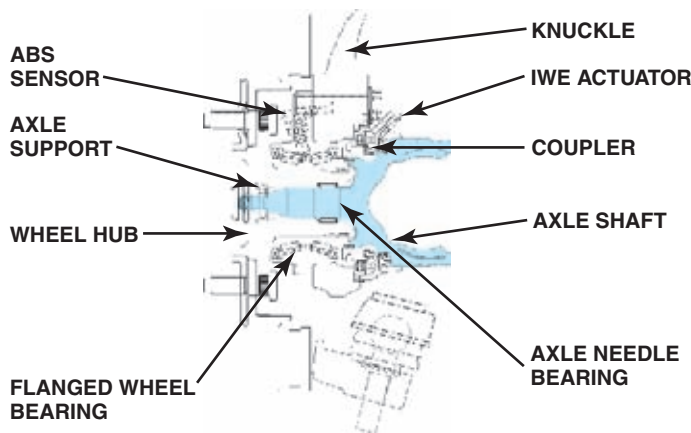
On an integrated wheel end, the coupler is moved to the left by a wave spring to lock the wheel hub to the axle shaft/CV joint housing. The coupler is moved to the right by vacuum to disconnect the wheel hub from the axle shaft. (Courtesy of Warn Industries)
